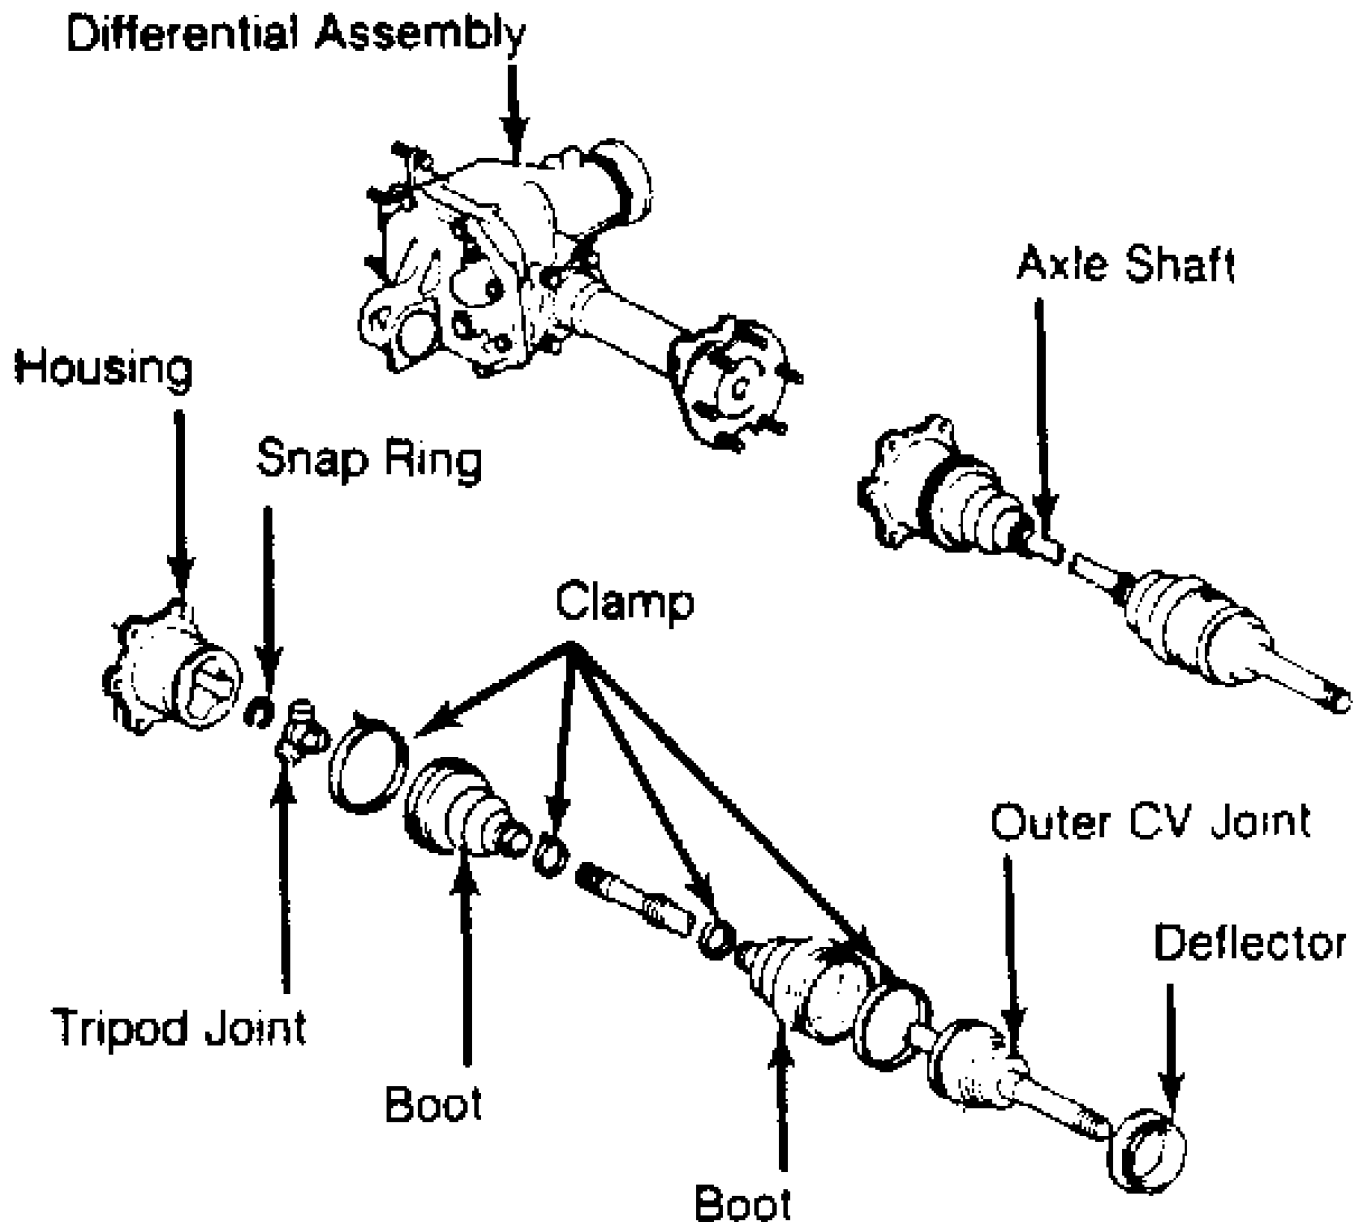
Exploded View of Pickup, Van & 4Runner Drive Axle Shaft
